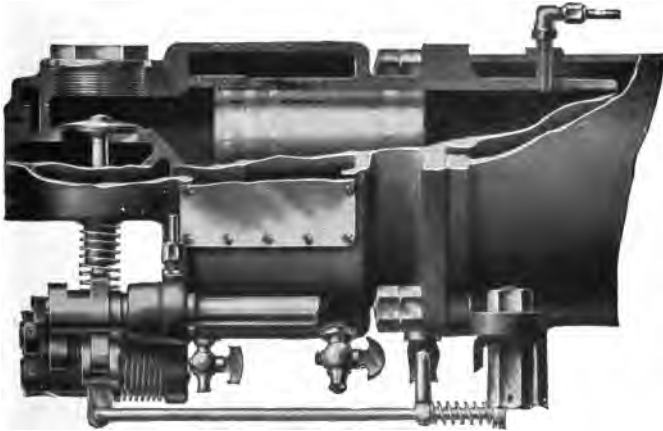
END OF CYLINDER SHOWING VALVE AND VALVE CHAMBER.
